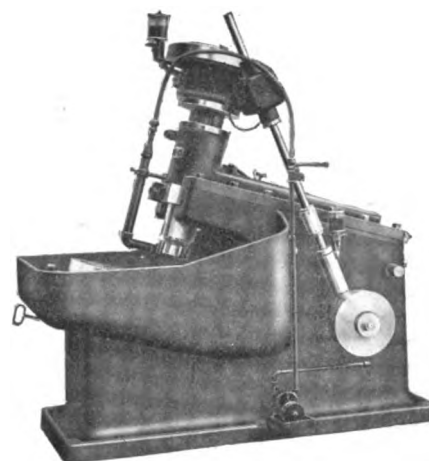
"Ohio" Tilted Rotary Milling Machine
